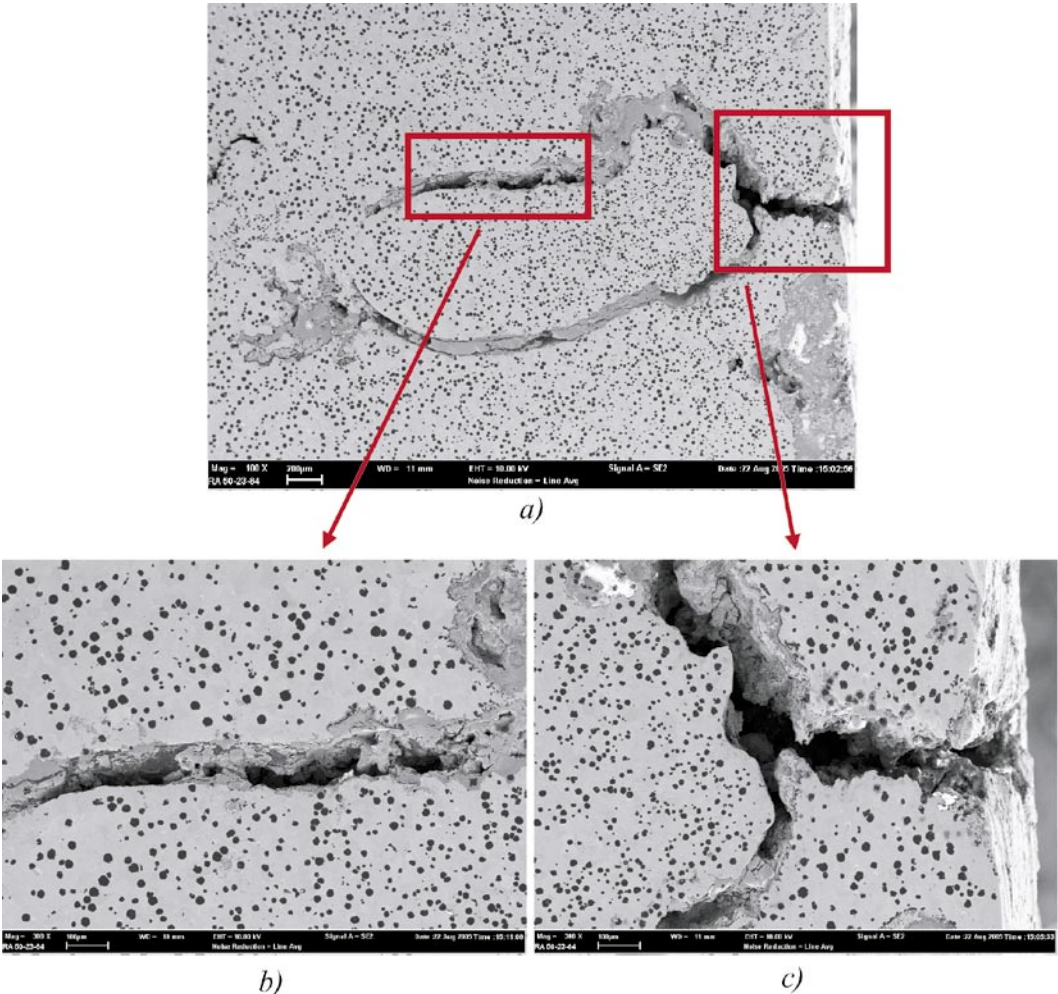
a) Manufacturing defect with stable tearing to free surface b) smooth fracture surface for casting defect c) stable tearing serrated crack surface.
